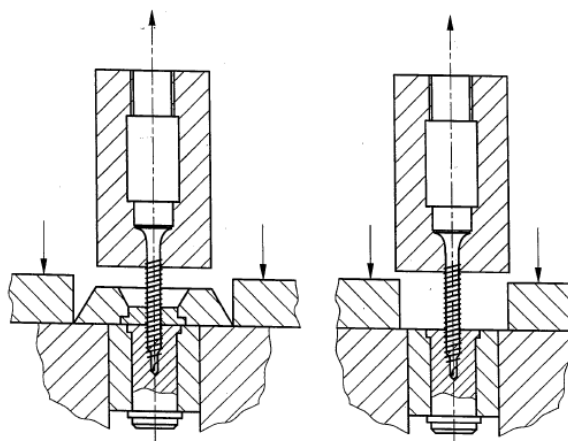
TESTING FIXTURE FOR RESISTANCE TO ATTACK BY PLUG/CYLINDER EXTRACTION
